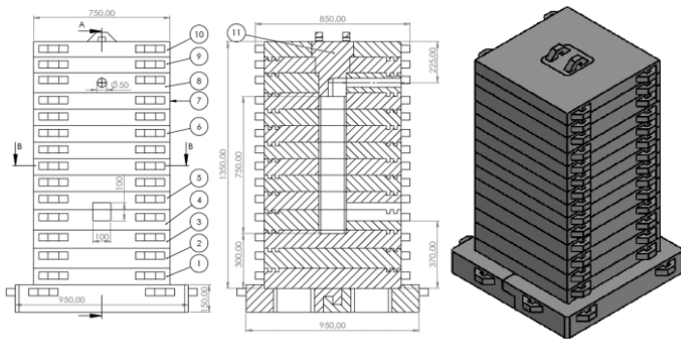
Technical drawing for the design and 3D assembly of the OHM, hosting neutron generator.
